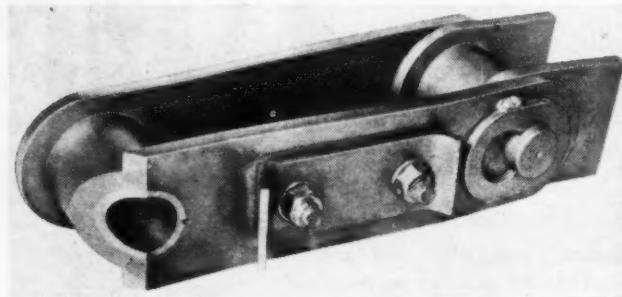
CUTAWAY VIEW OF SINGLE CHAIN LINK
